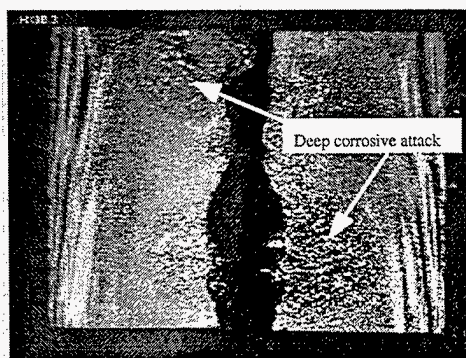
Fracture surfaces of a Rochelle exposed specimen at 1430°C showing material loss from the surface.
